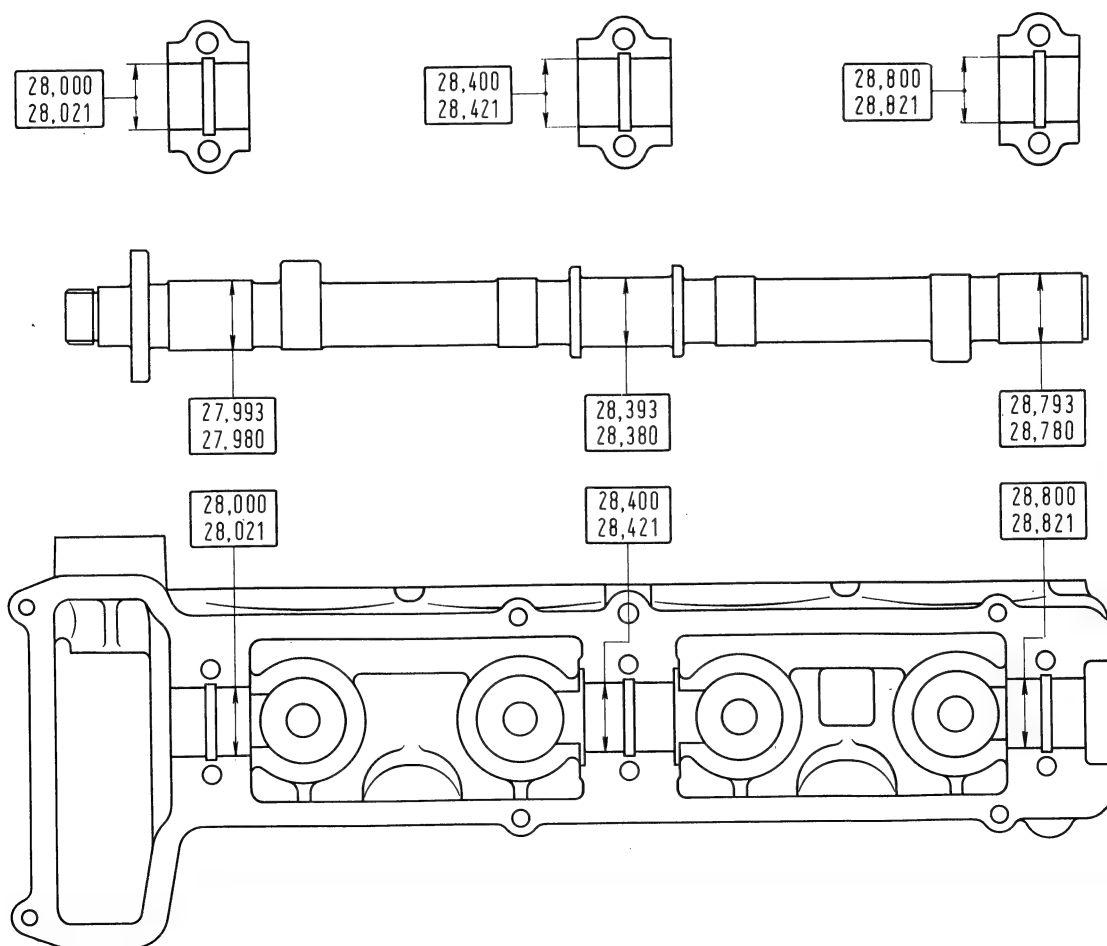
Critical dimensions (in mm) of 118 B.000 engine camshaft journals and bearings.
